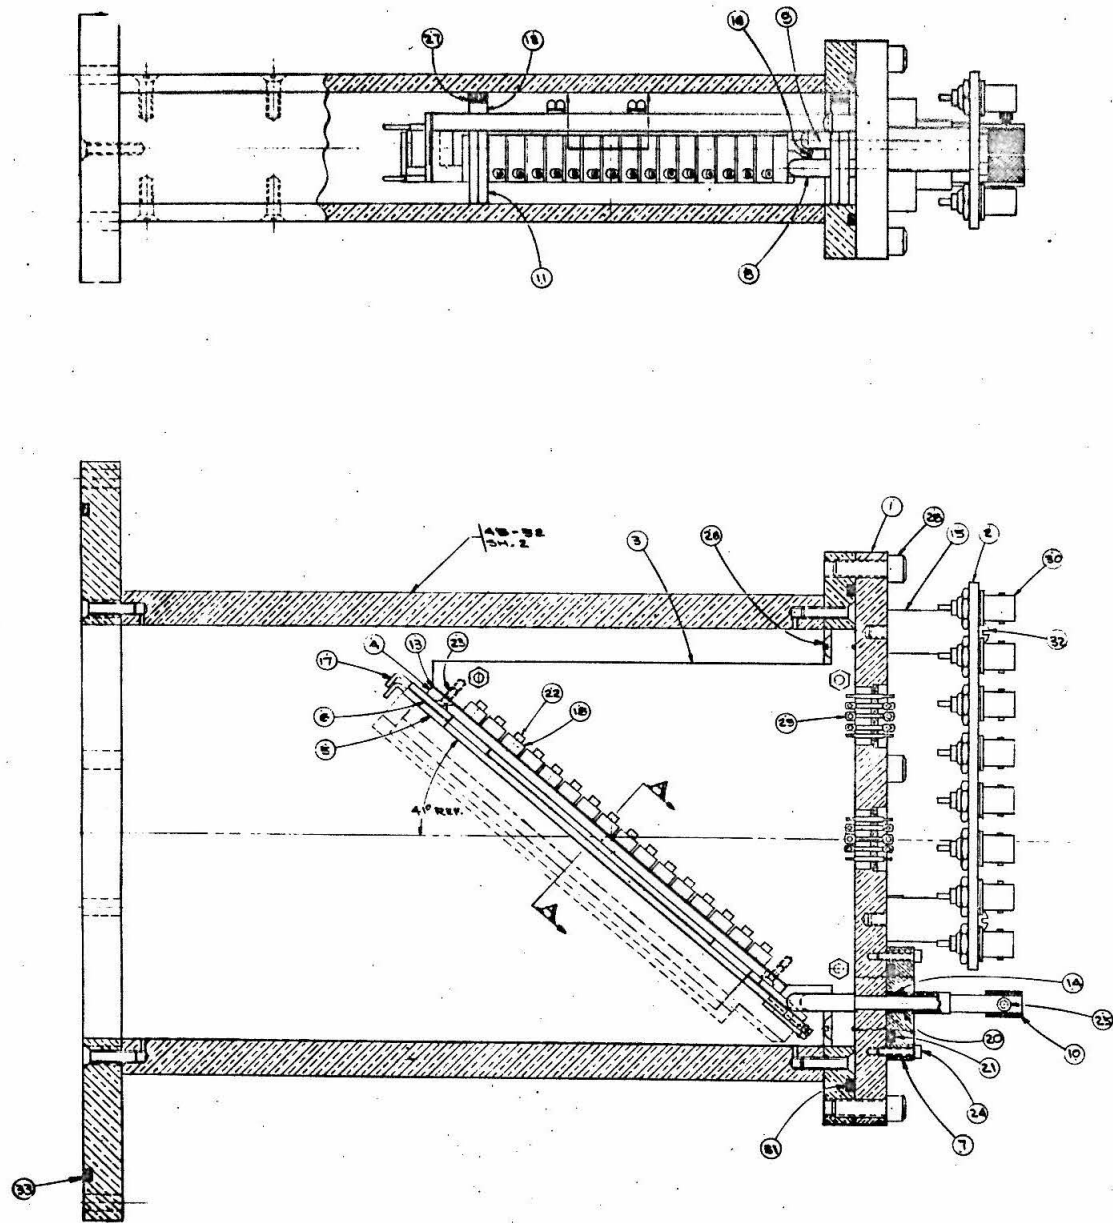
ASSEMBLY DRAWING OF ARRAY
